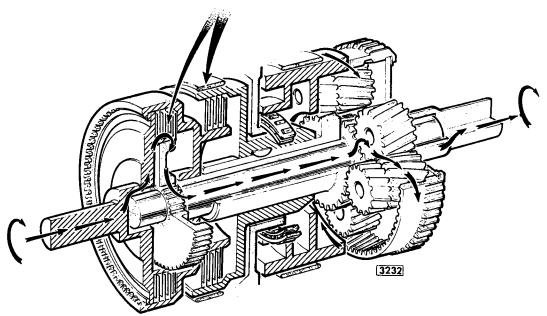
Mechanical power flow-Second gear (Lock up or Drive 2) selected.
